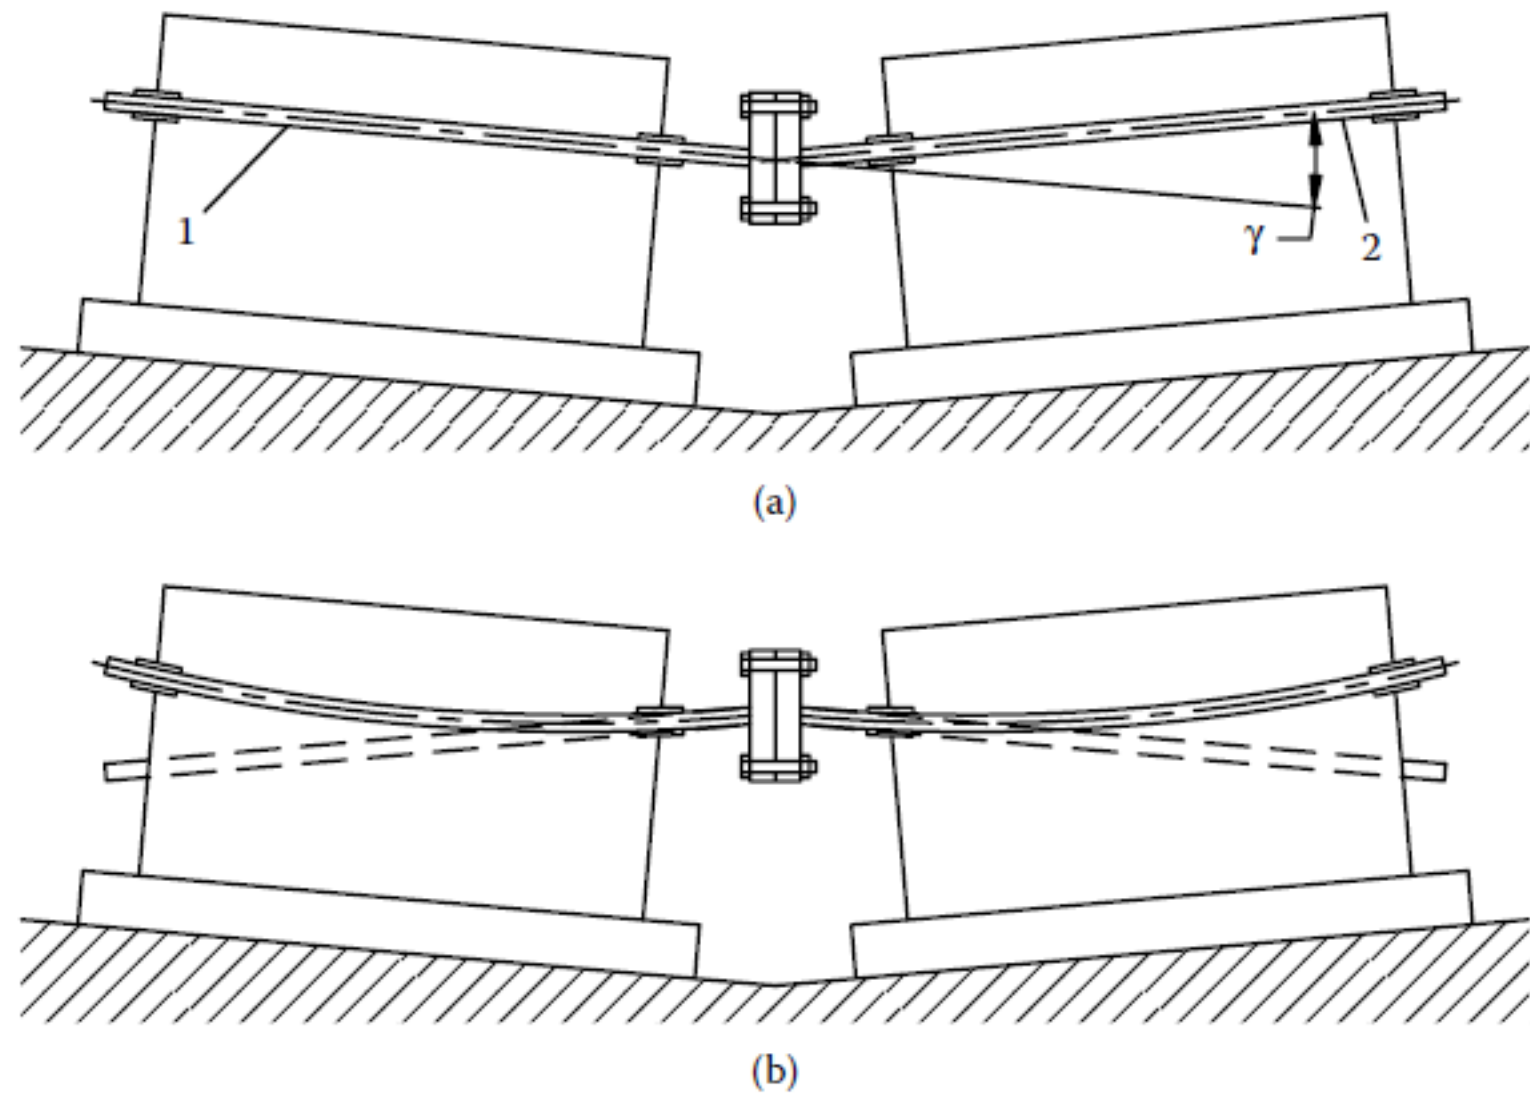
Effect of angular misalignment on shaft and bearing loads.
